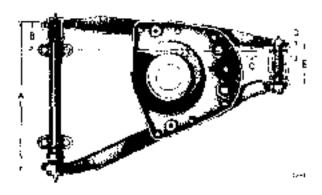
Installing Lower Control Arm Bar Bushings with Tool (1) C-594 (1940-42 Models)
